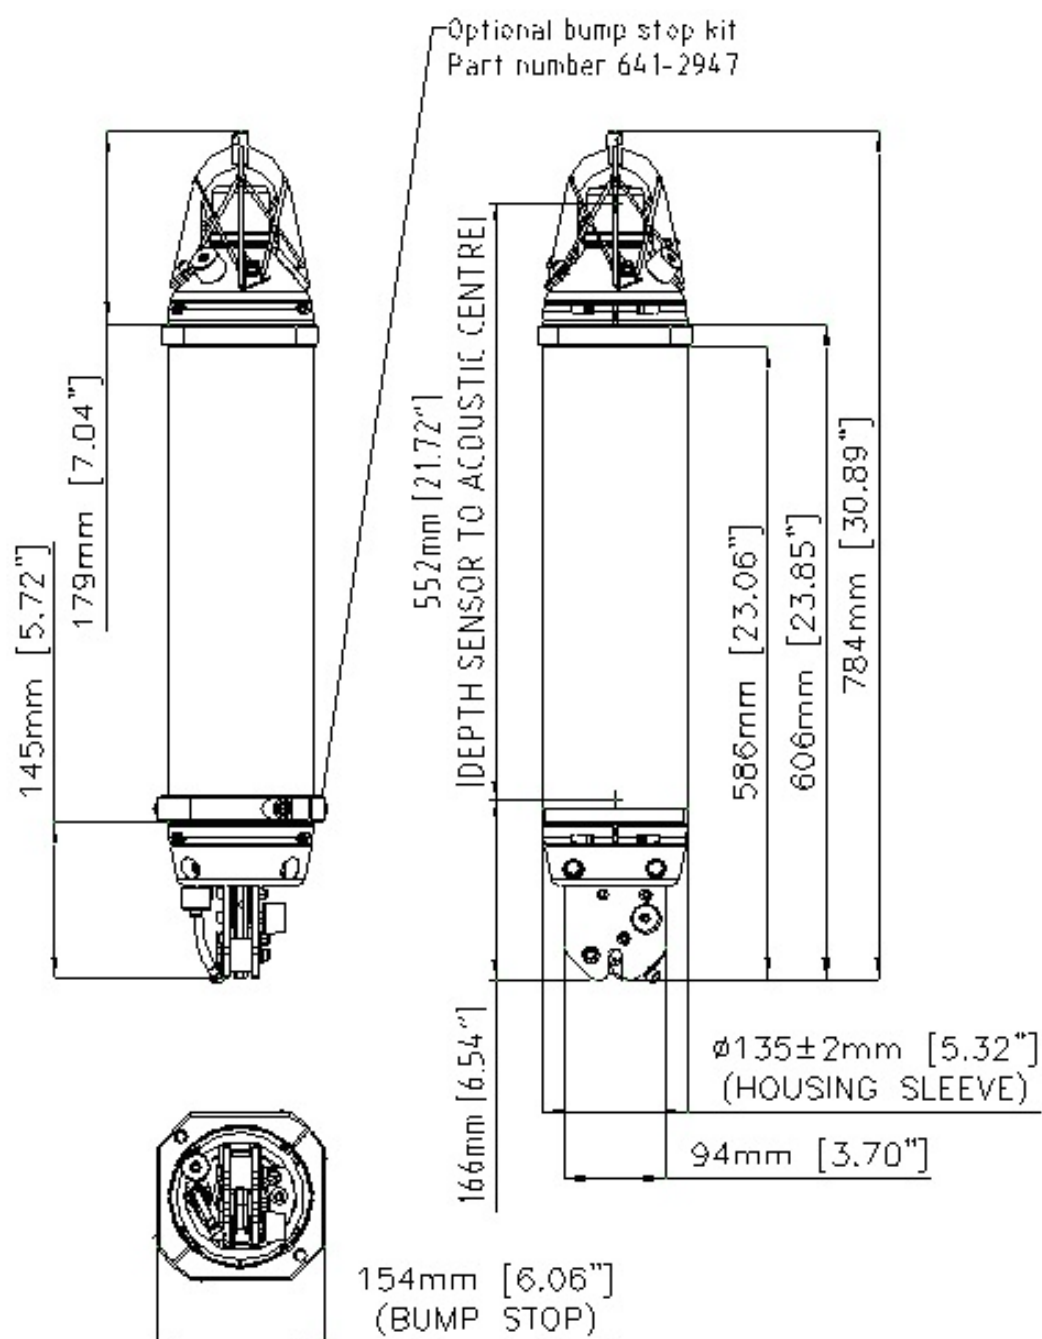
OUTLINE DRAWING: TYPE 8000-000-03 MIDI UNIT
